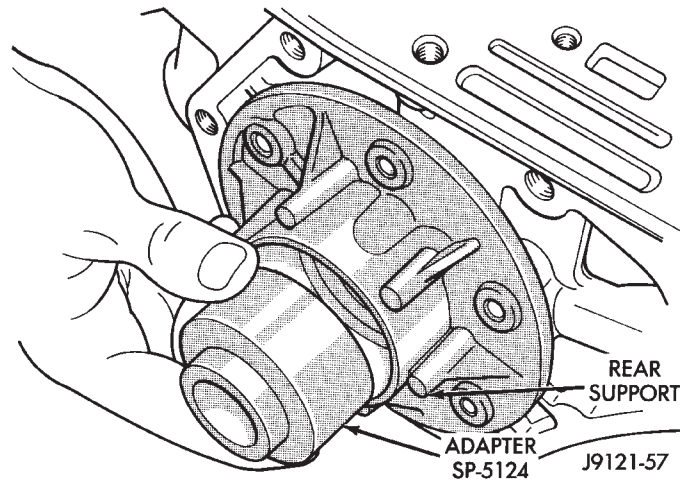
Positioning Adapter Tool In Rear Support Or Overdrive Piston Retainer—46RH
